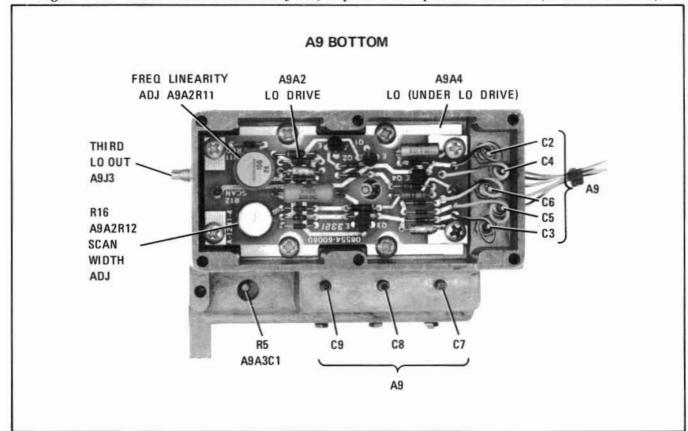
Third Converter Assembly A9, Bottom View Component Locations (A9A2)
